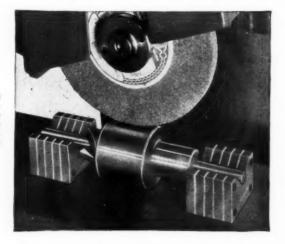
Magnetic V-Blocks easily solve holding problems in connection with round work pieces. Here the piece is held securely while the flat surface is ground on top.
